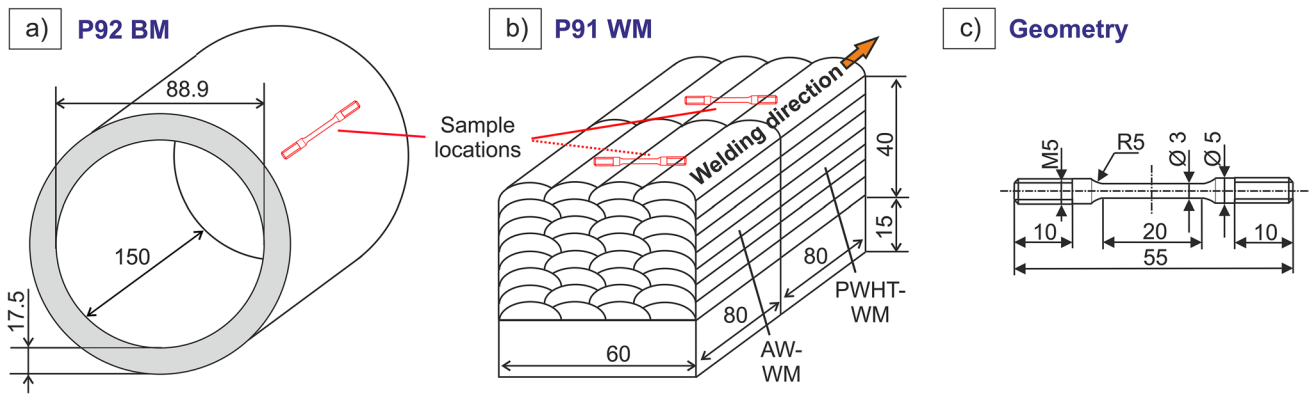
Sample materials and specimen location: (a) P92 BM tube section, (b) P91 WM block, and (c) tensile specimen geometry
